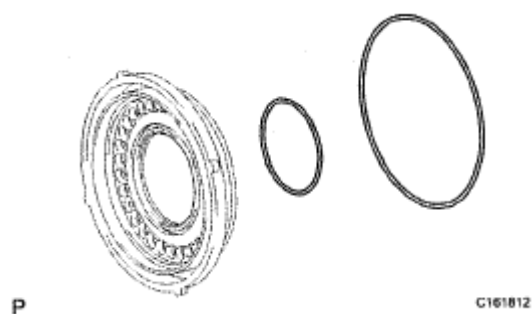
Identifying O-Rings From Direct Clutch Piston
